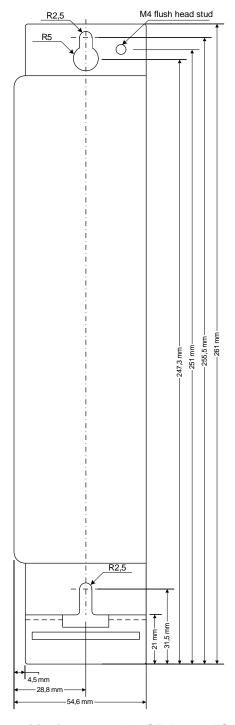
Servo positioning controller SE-Power FS 1kVA: Mounting plate
